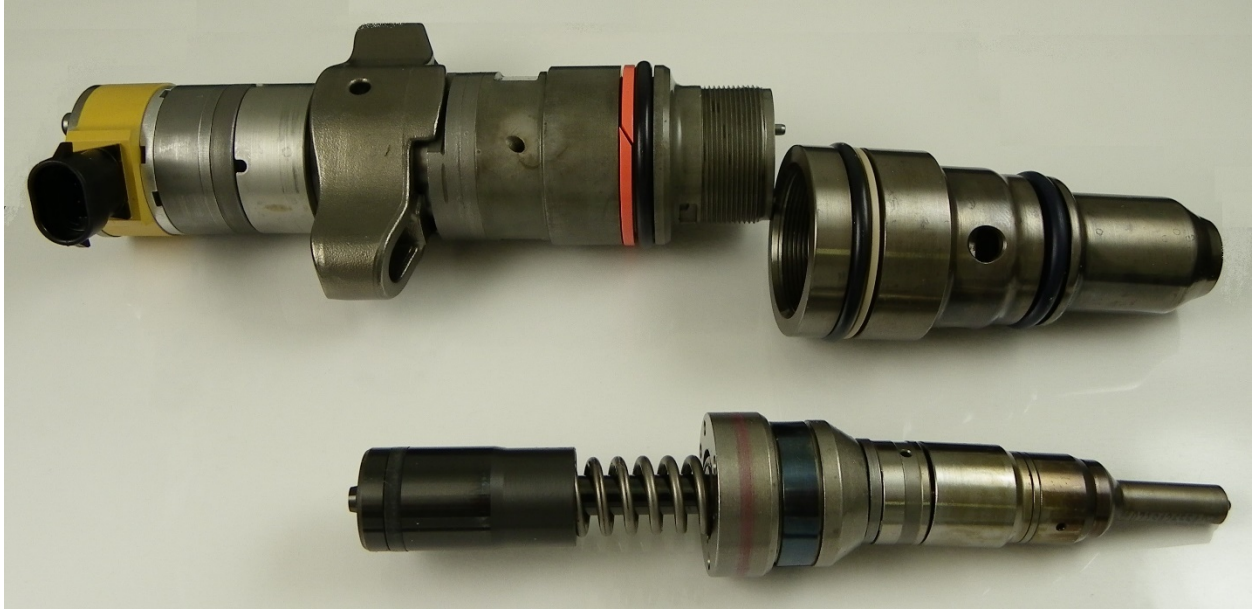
Caterpillar C7 HEUI Injector – Barrel Assembly Removal
